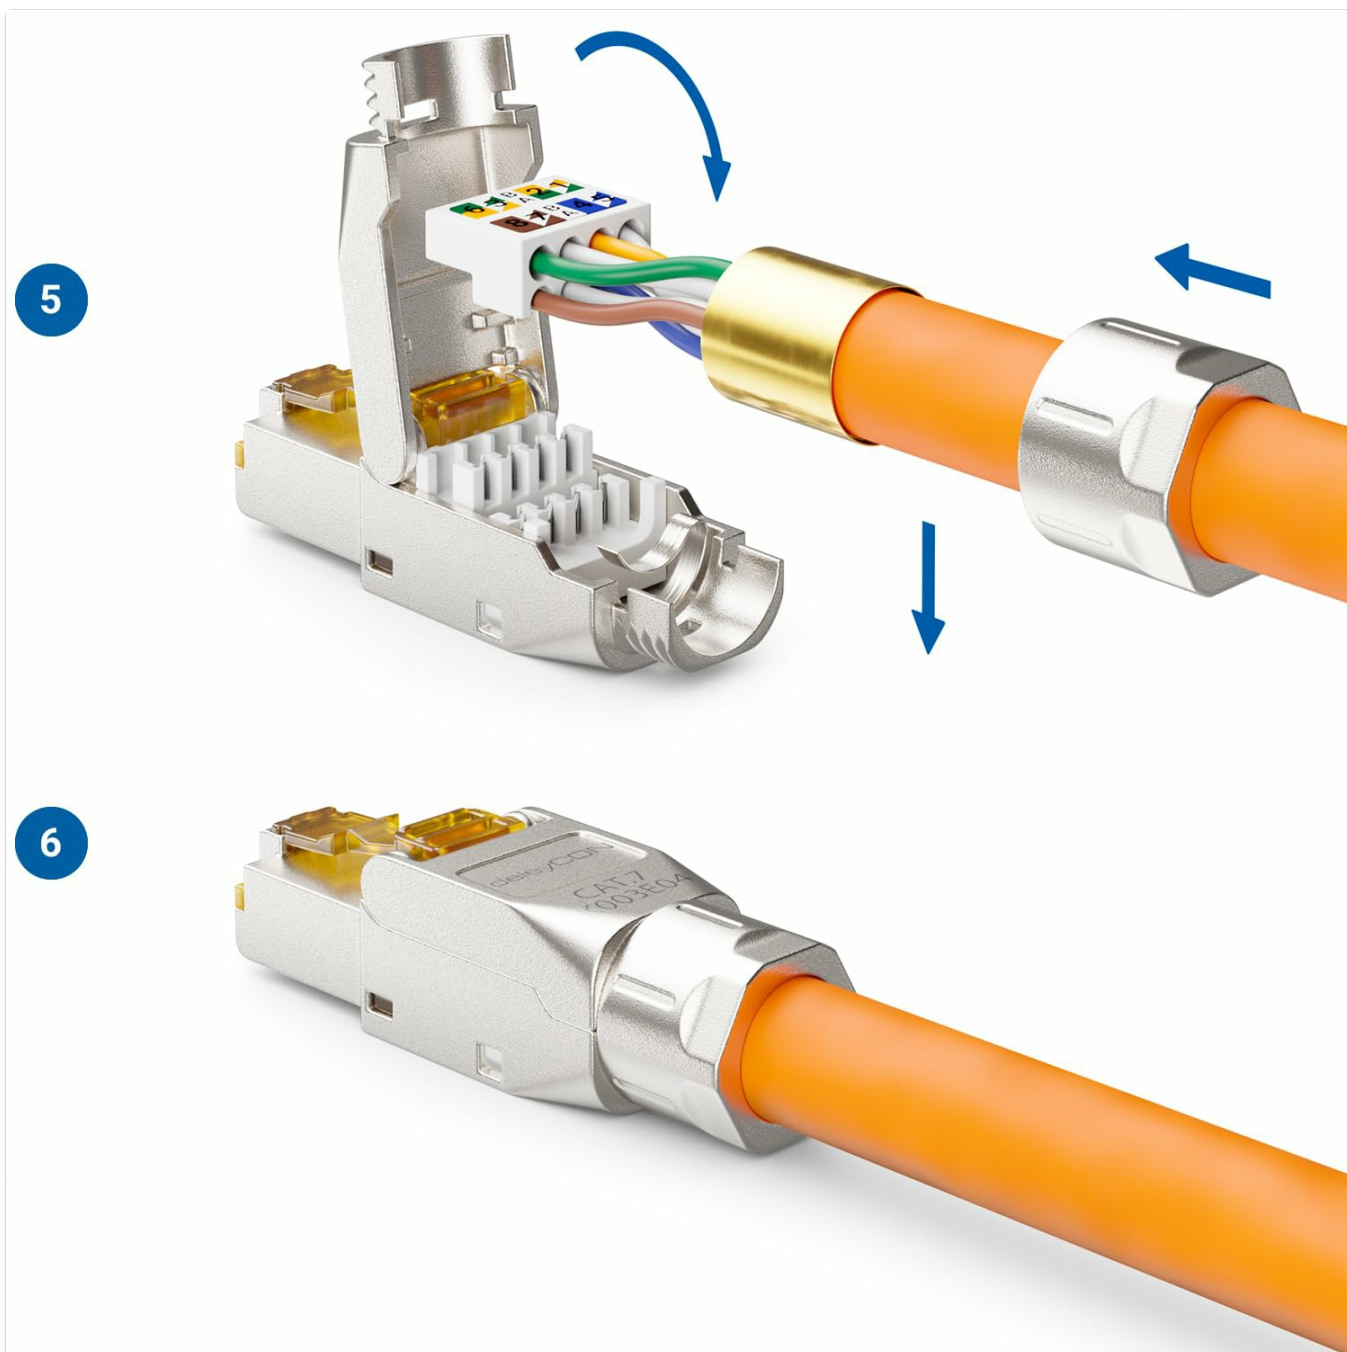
of the installation, showing the connector being closed over the LSA block and the cable, followed by the screw cap being tightened for strain relief and secure fitting.
